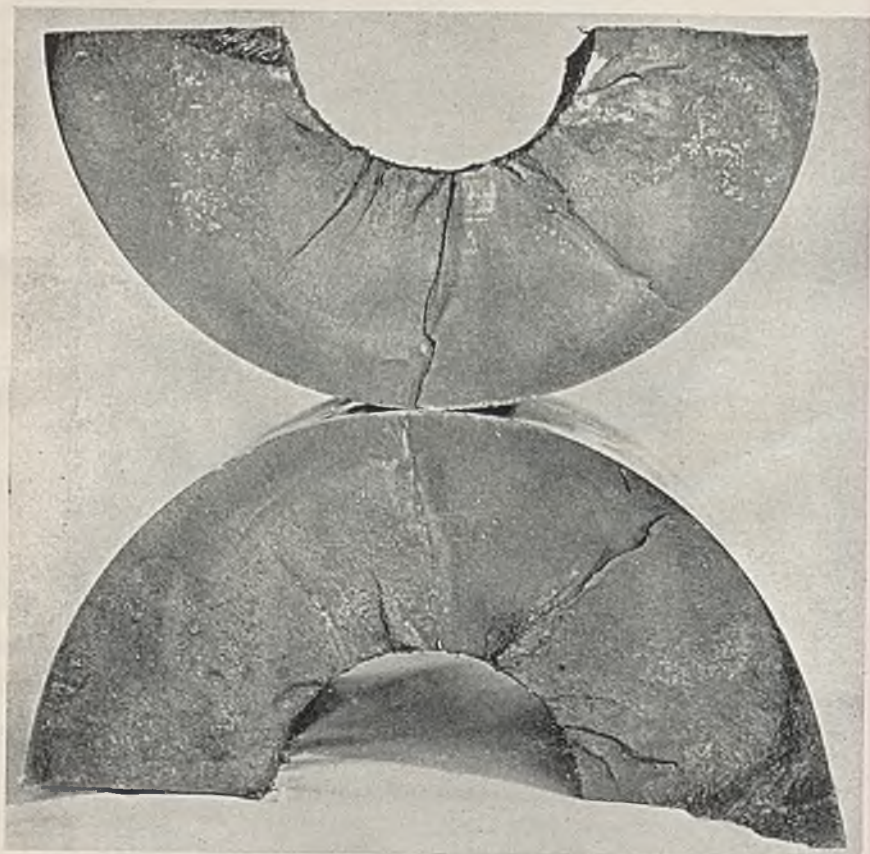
Fractured Surface of the Rod shown in Fig. 2.
